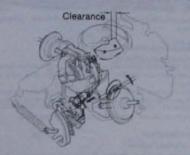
Checking the choke valve clearance - Alsan carburettor
